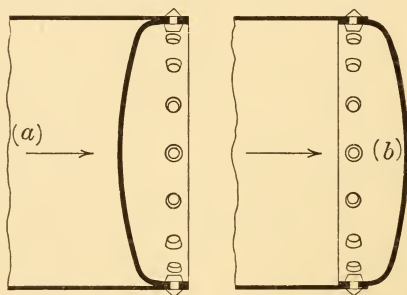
Bumped heads. (a) Concave head. (b) Convex head. Arrows show the direction of pressure.
